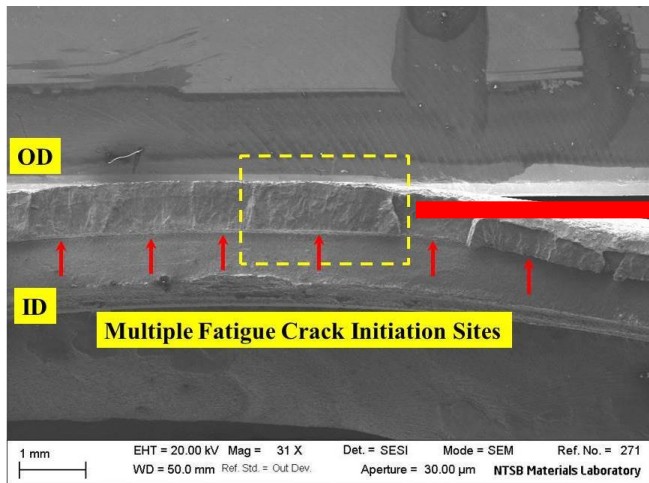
MULTIPLE THROUGH-WALL CRACK INITIATION SITES
